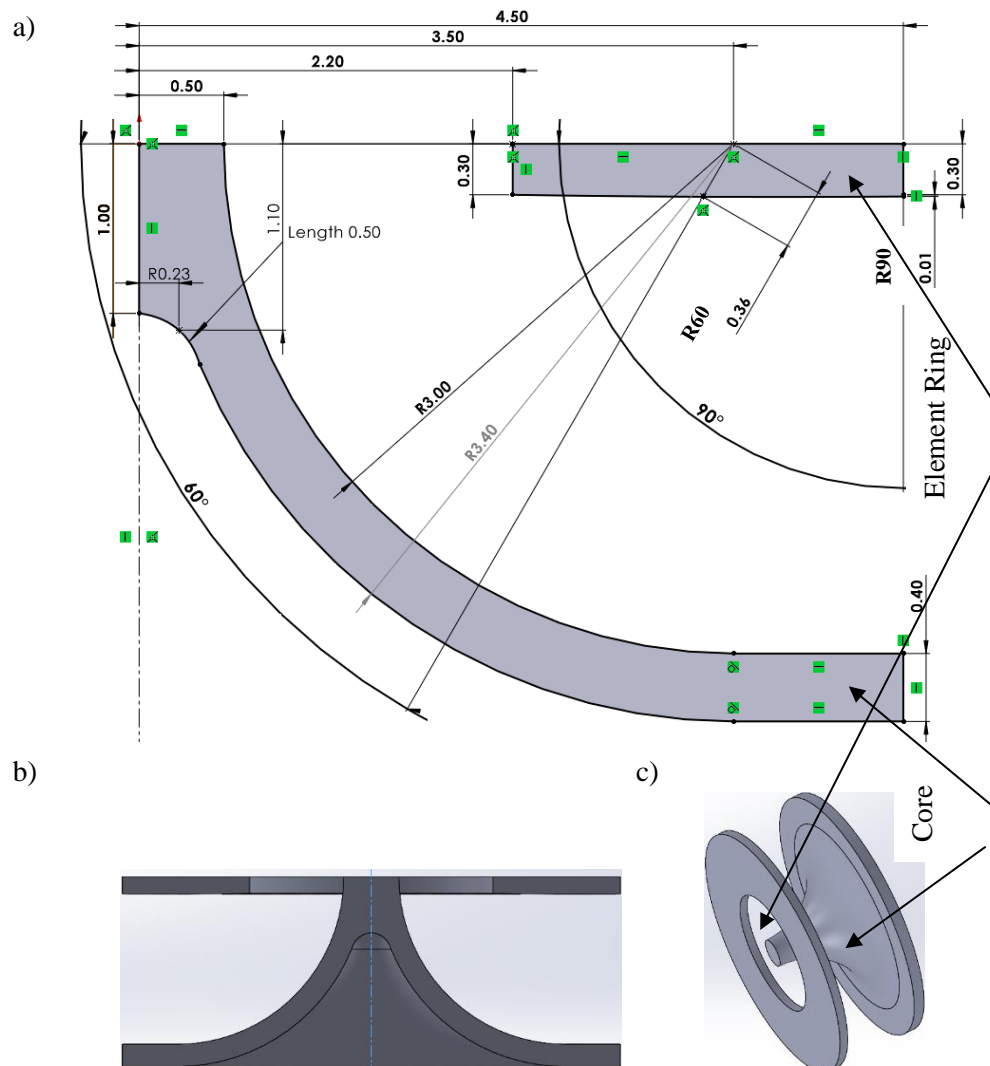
Ventilation element CAD model with lower bounds of design variables: a – 2D sketch for CAD revolve feature of the element (the ring is coincident with the outer layer of clothing in this case); b – 3D cross-section view; c – isometric view
